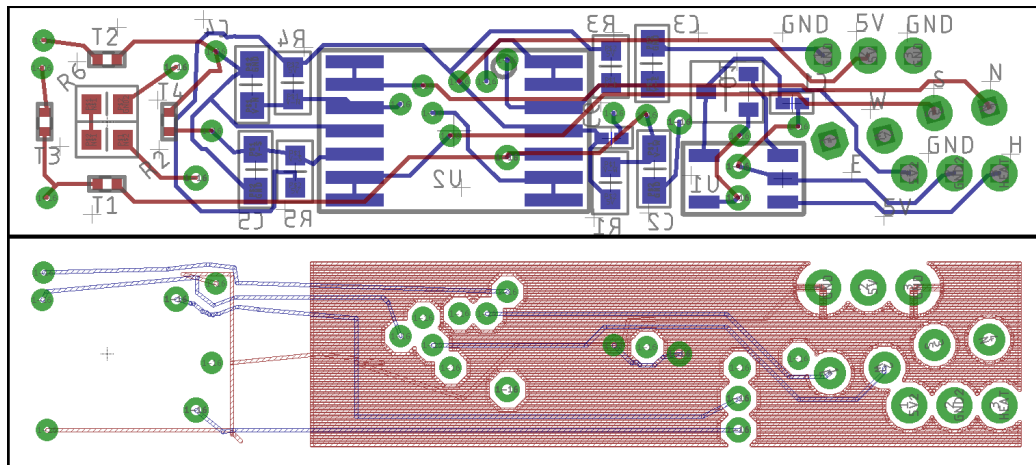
Slip sensor PCB in EAGLE. Top shows top and bottom layers of the PCB. Bottom image shows internal layers 2 and 3. Traces are 4 mil. Spaces are 6 mil for different signals, 2 mil for same signals. See Appendix A for slip sensor schematic and bill of materials.
